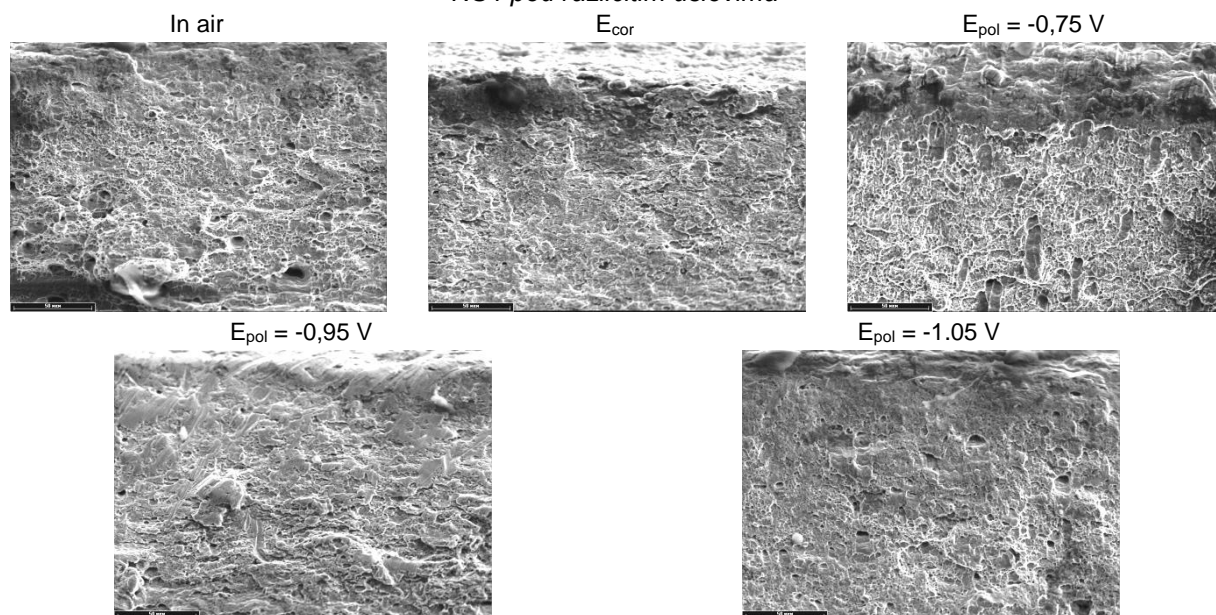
Fracture surfaces of welded joints of X70 steel samples after corrosion-mechanical tests in air and in NS4 solution under different conditions
